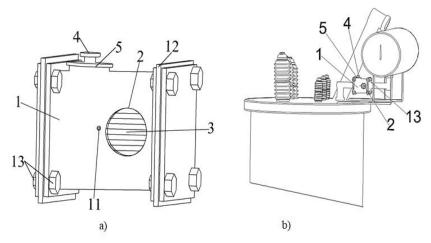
Gas relay: a) its general view; b) fixing it in the transformer pipe section
